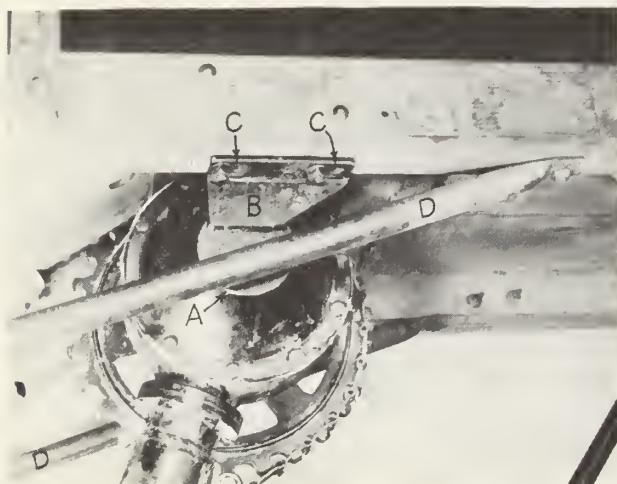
Axle housing cut off at A, and 1/2-inch steel plate welded across opening. B is 1/4 x 1-1/2 x 2-1/2 x 6 inch angle welded to the plate. The bolt holes C are slotted for chain adjustment. Platform braces D are 3-foot lengths of 1-inch iron pipe.
